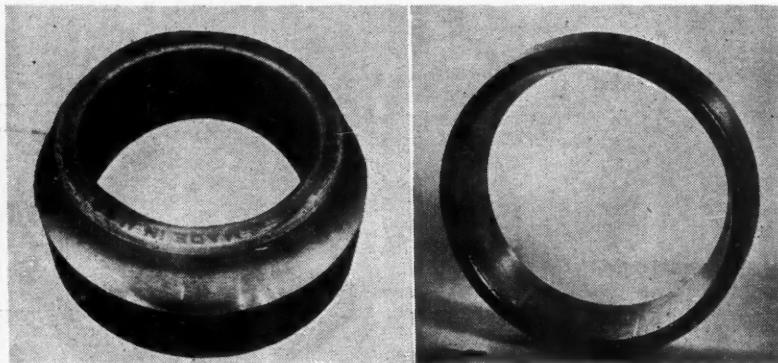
Examples of (left) ball type and (right) roller type automobile wheel bearings indented
